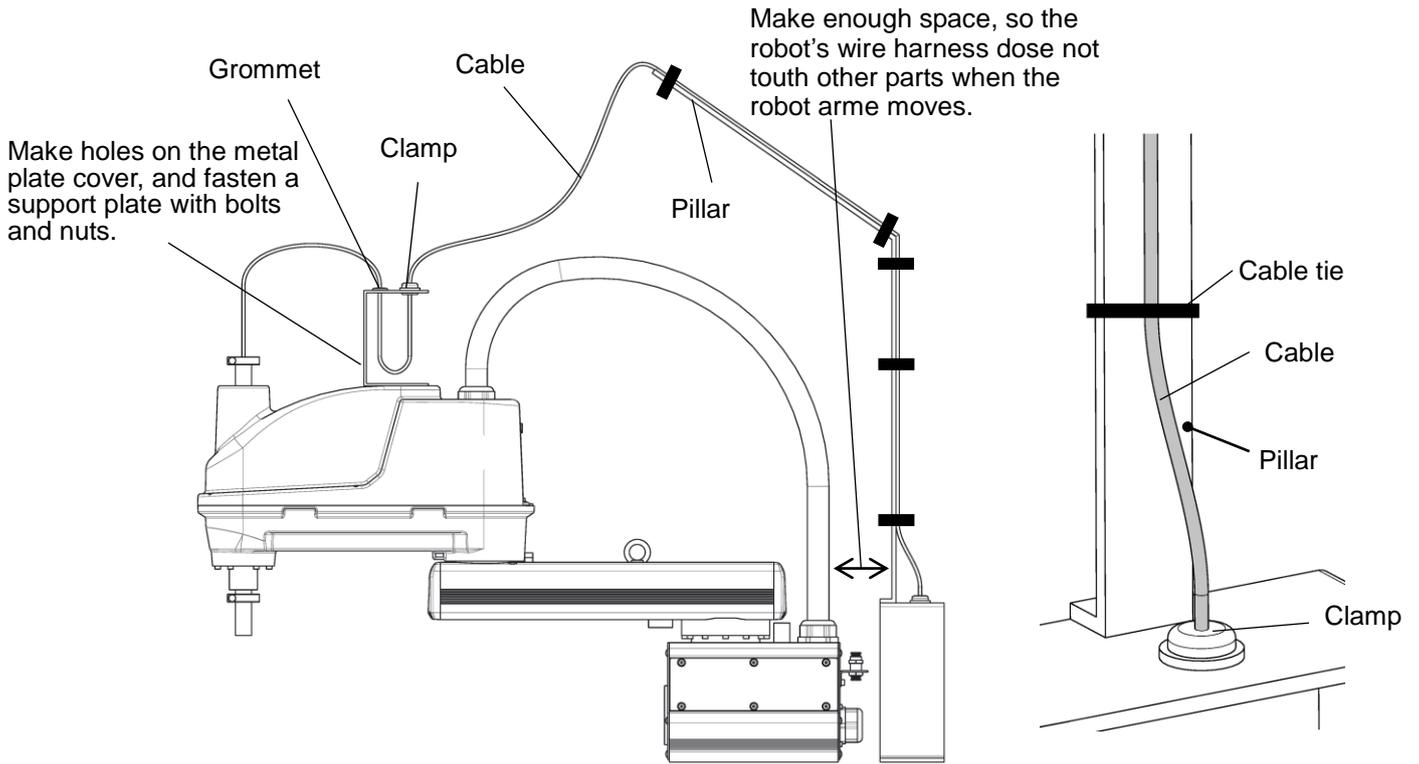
Tool cable wiring installation example (KHL-500/KHL-600/KHL-700)
